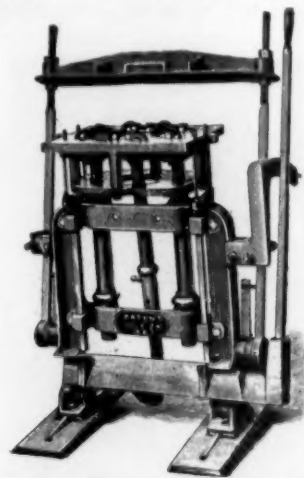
THE IMPROVED REYNOLDS MACHINE.
